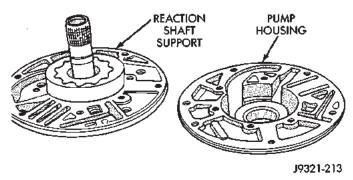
Separating Pump Housing From Reaction Shaft Support
